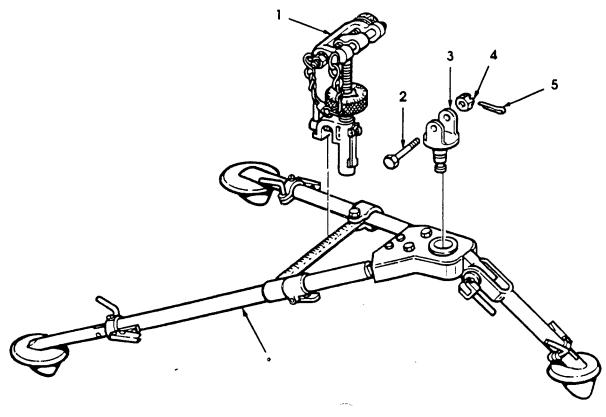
Mount, Tripod, Machine Gun, M3 8403398 (Assembled View).
